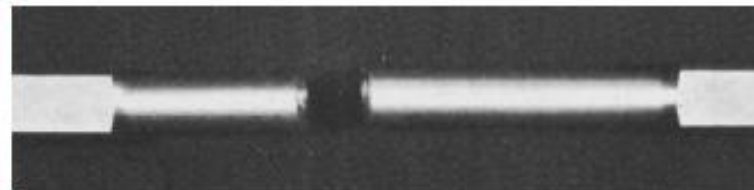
Failure of torsion of a circular bar of ductile cast iron, showing a shearing failure over a normal cross-section of the bar.
